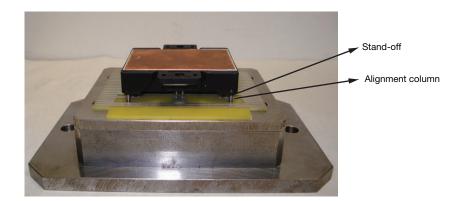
Step 2: Put the EMIPAK module on the PCB and make sure the alignment column is aligned into stand-off.
